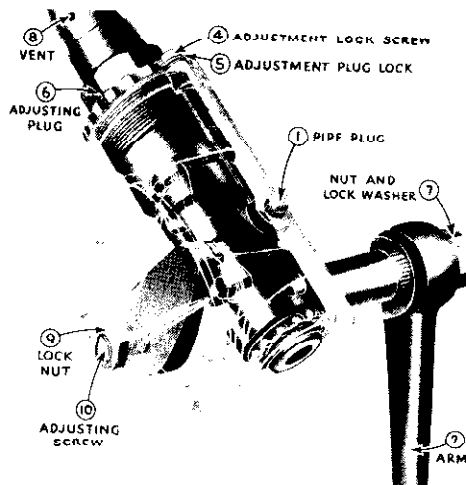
Illustration No. 55—Phantom View of Steering Gear J-25 and J-30 Models
